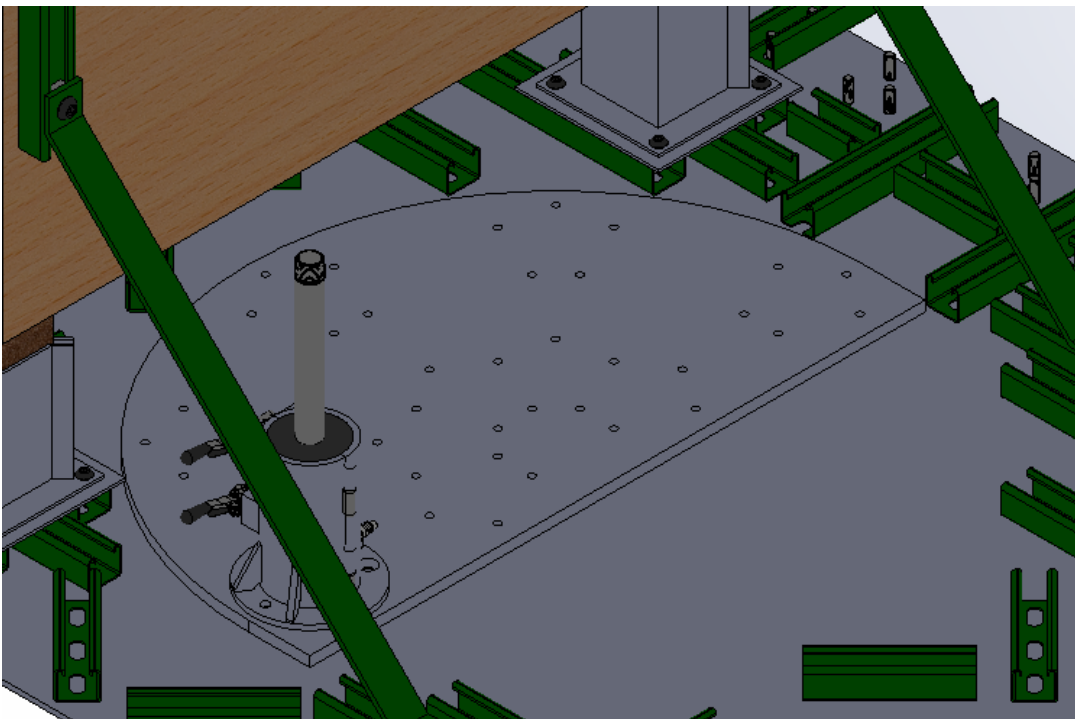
Vertical Riser Clamp Base Plate with Threaded Holes, Welded to Unistrut Base Plate
